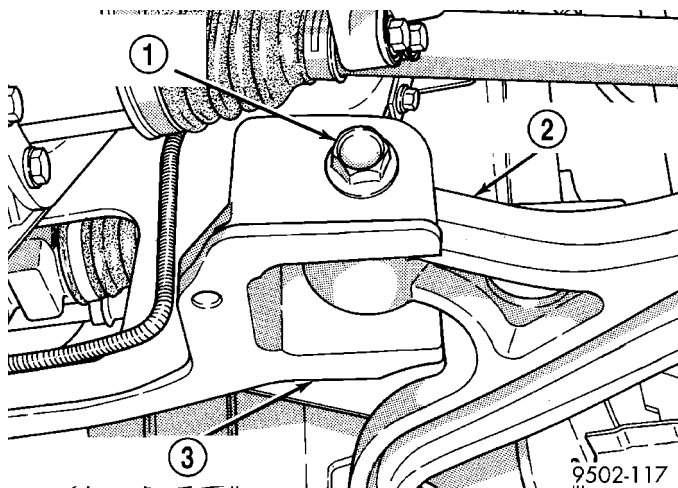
Lower Control Arm Bushing Pivot Bolt Correctly Installed
